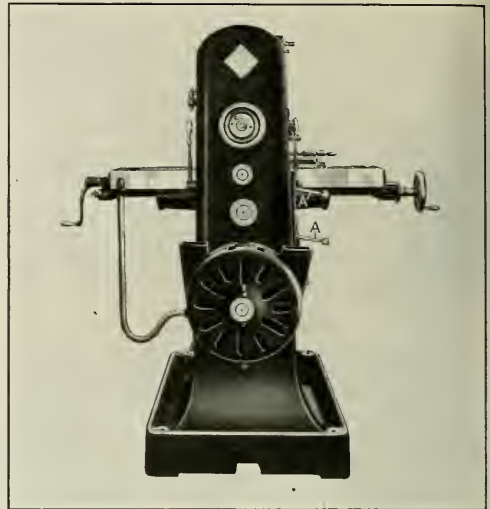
Rear View of the Machine, showing the Bracket supporting the Driving Pulley
